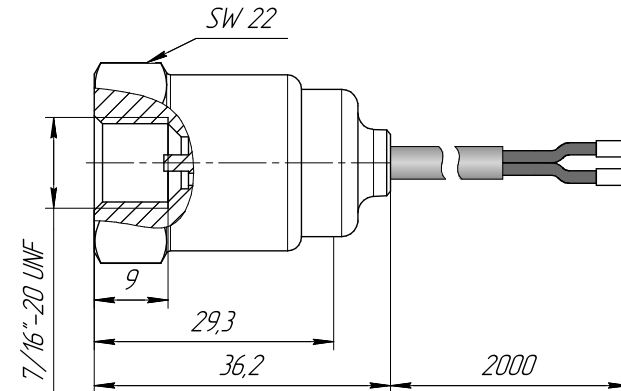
Technical drawing of the model FP-PT-10(35) B(W)
